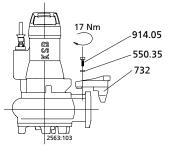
Fastening the claw for guide wire, single guide rail and guide hoop arrangement
